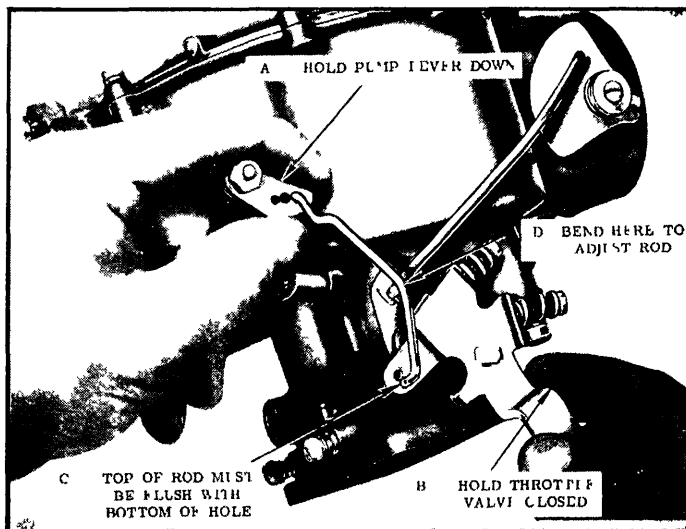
B Pump lever adjustment on Oldsmobile 1949-50 carburetor
